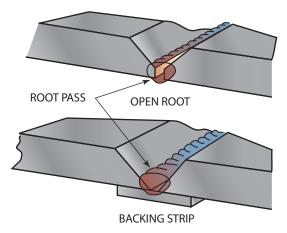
Root pass maximum deposit 1/4-in. (6-mm) thick.
